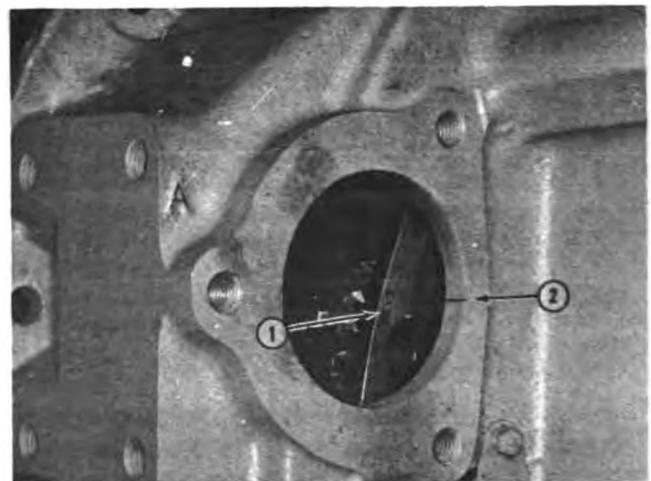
, (K21918). Valve set marks on right bank flywheel and housing — KT(A)-2300
